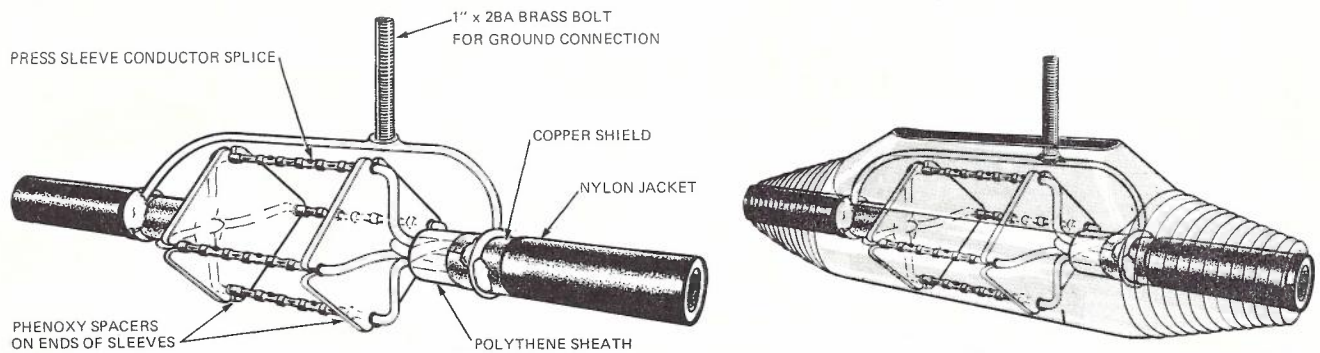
Precision Splicing Method for Single Quad Cable. Left: Details of Components. Right: Epoxy Resin Encapsulation.
